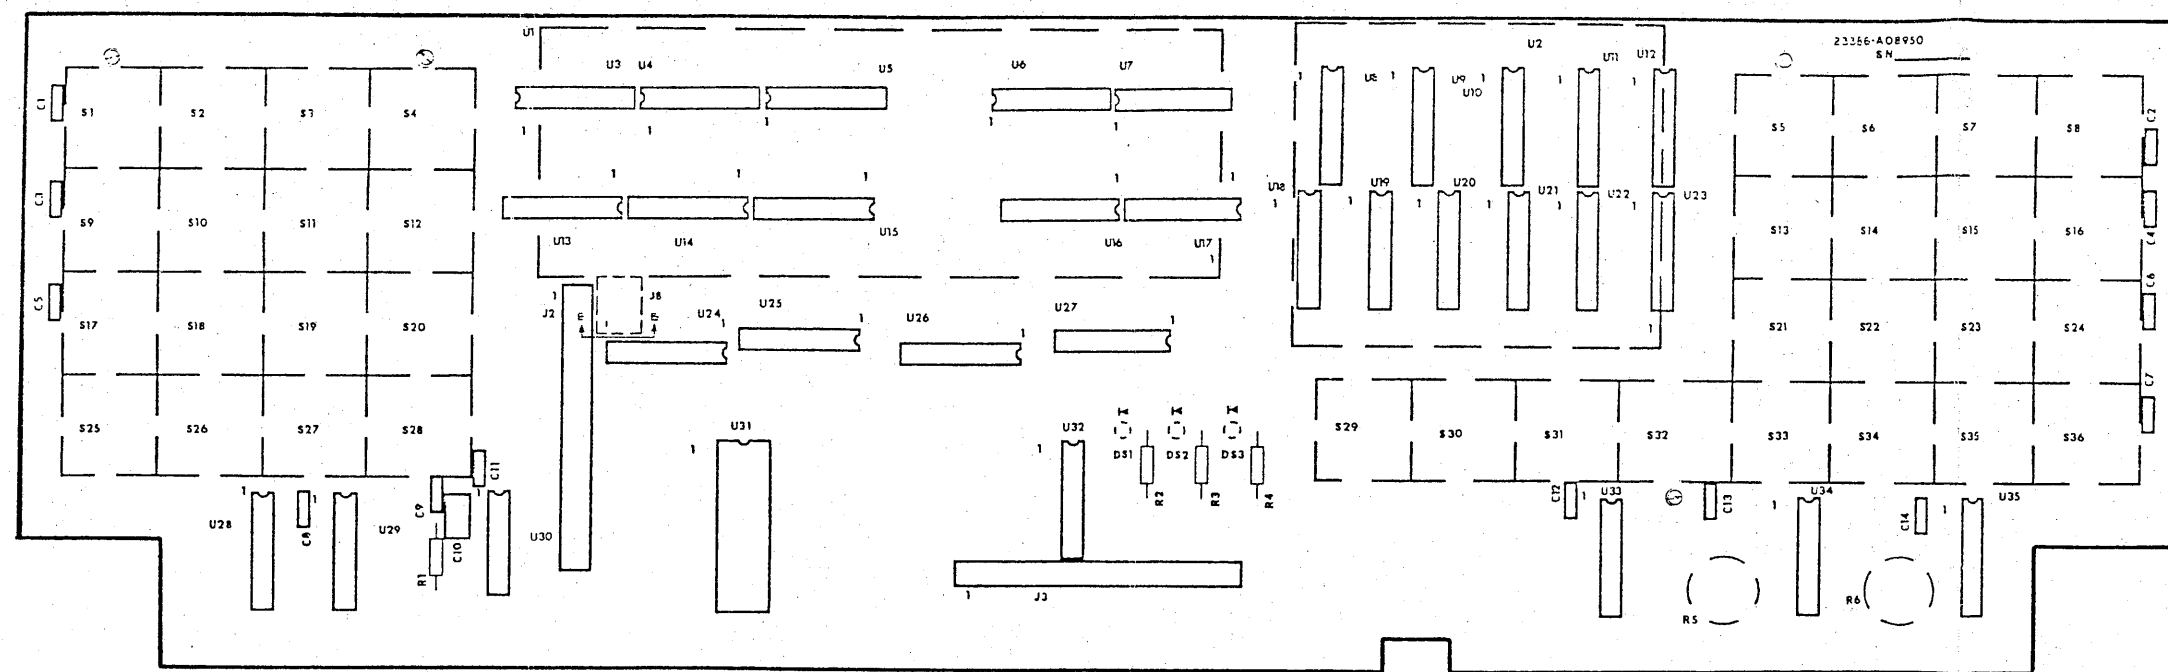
Switch/Display Circuit Card Assembly (A9A1) Component Location Diagram
